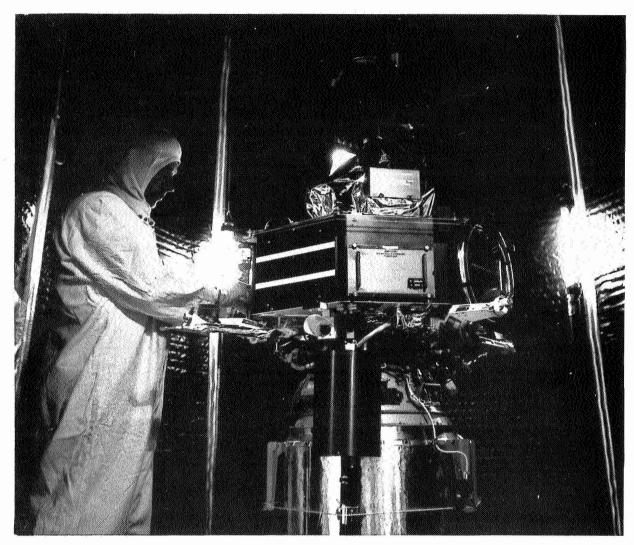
Technician Checking Paddle Arm Bracket While under Gantry Air-Cooling Hat
